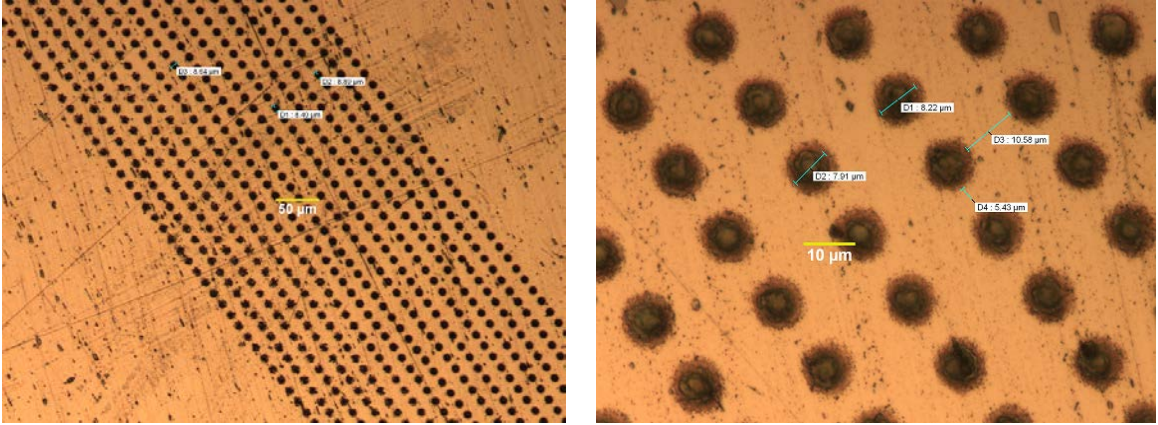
Optical microscopy of the laser machined sample. Magnification A. 10x, B. 50x
